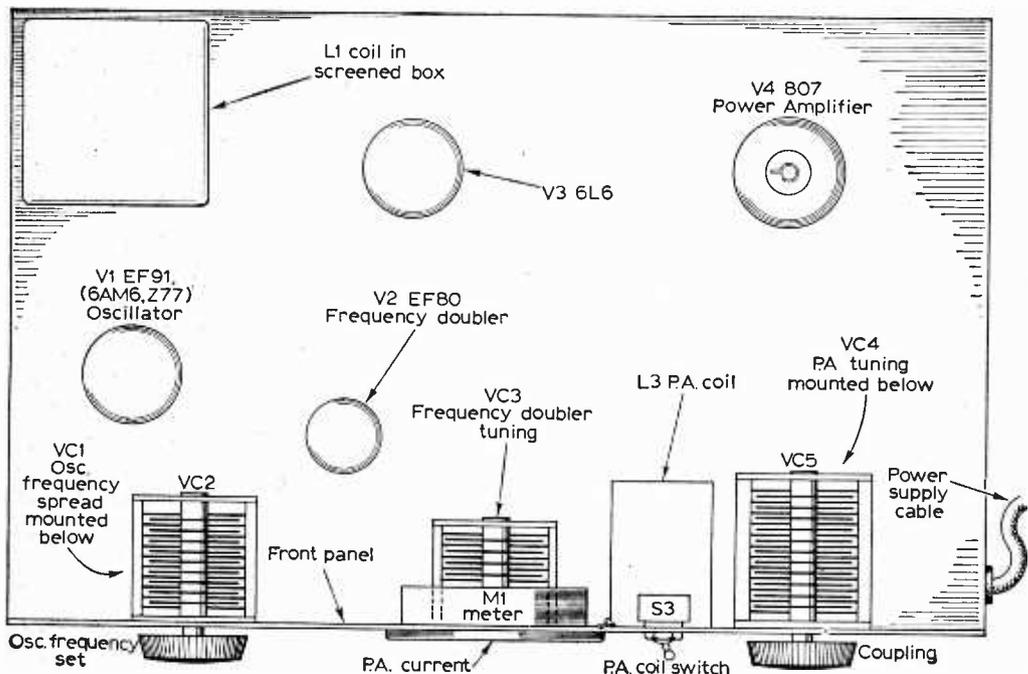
This is a top-of-chassis layout showing the positions of the major components.
